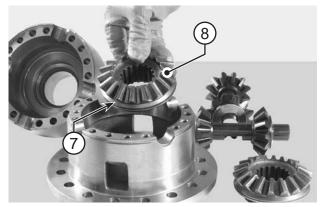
Remove the 2nd planetary gear (8) and shoulder ring (7).
